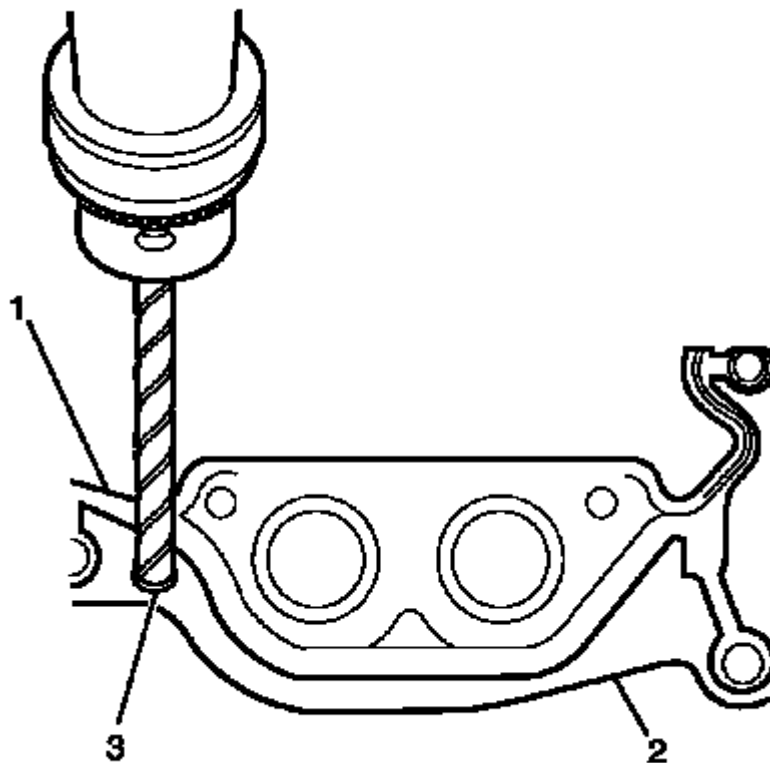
Identifying Retaining Rivets (Drilling Out)
